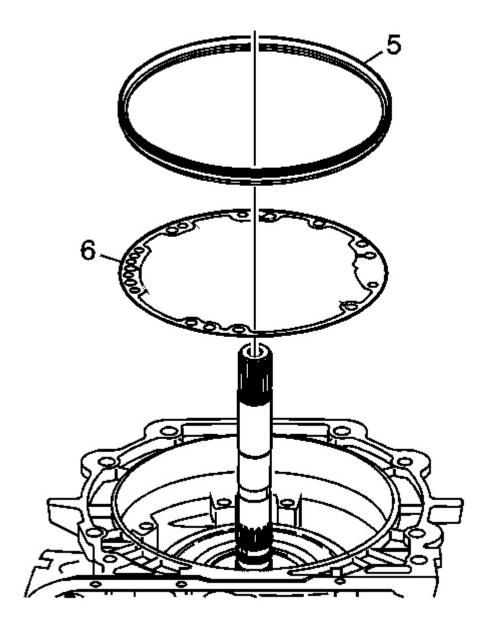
View Of Fluid Pump Seal & Gasket Courtesy of GENERAL MOTORS CORP.
